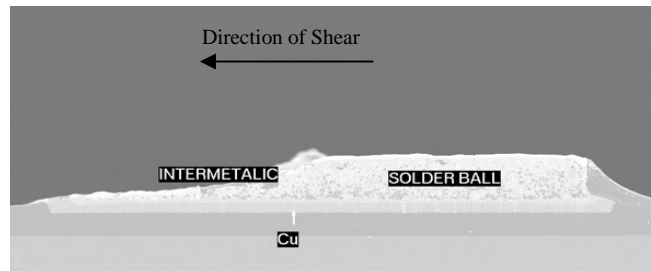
Cross-section SEM of a solder ball sheared in ball shear testing
